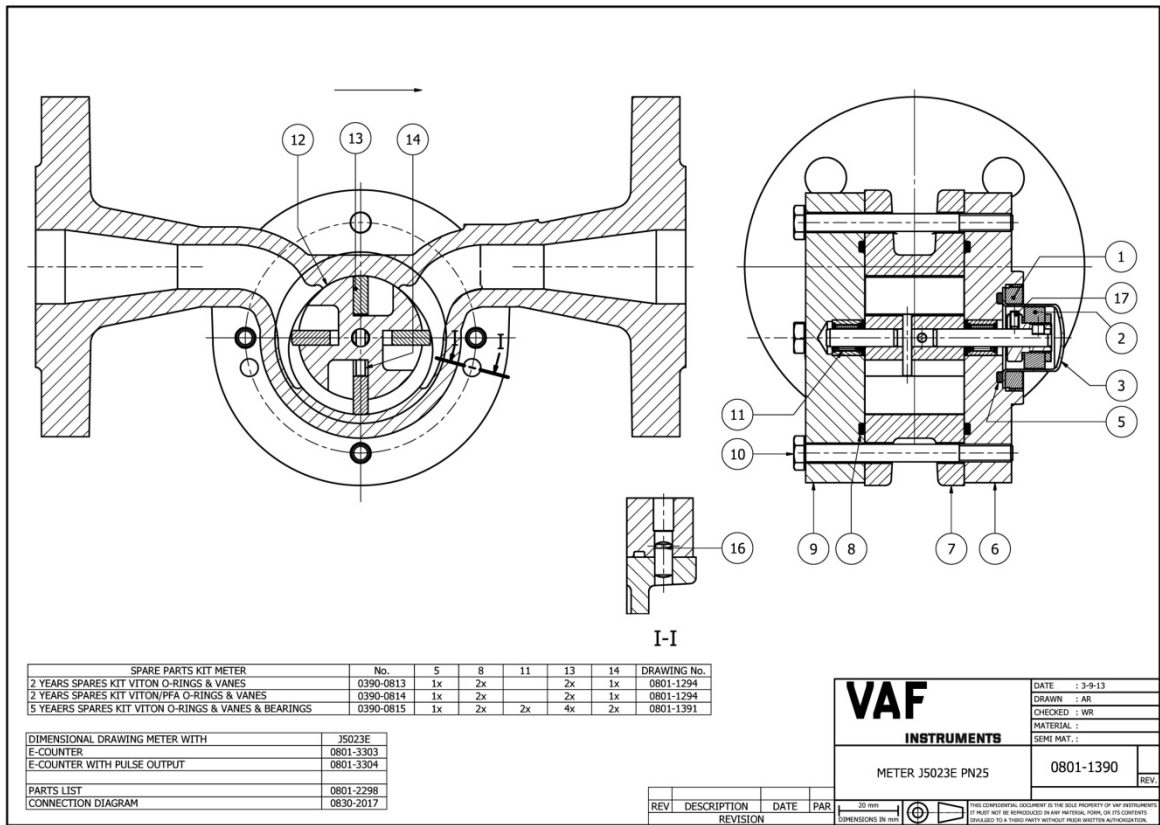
Drawing 0801-1390 – Meter J5023E PN25
